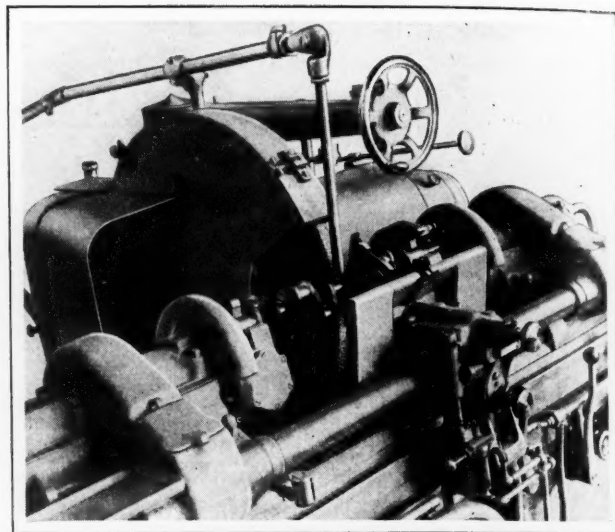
View of Hydraulic Rest in Forward Position and Arnold Gage on Pin being Ground
